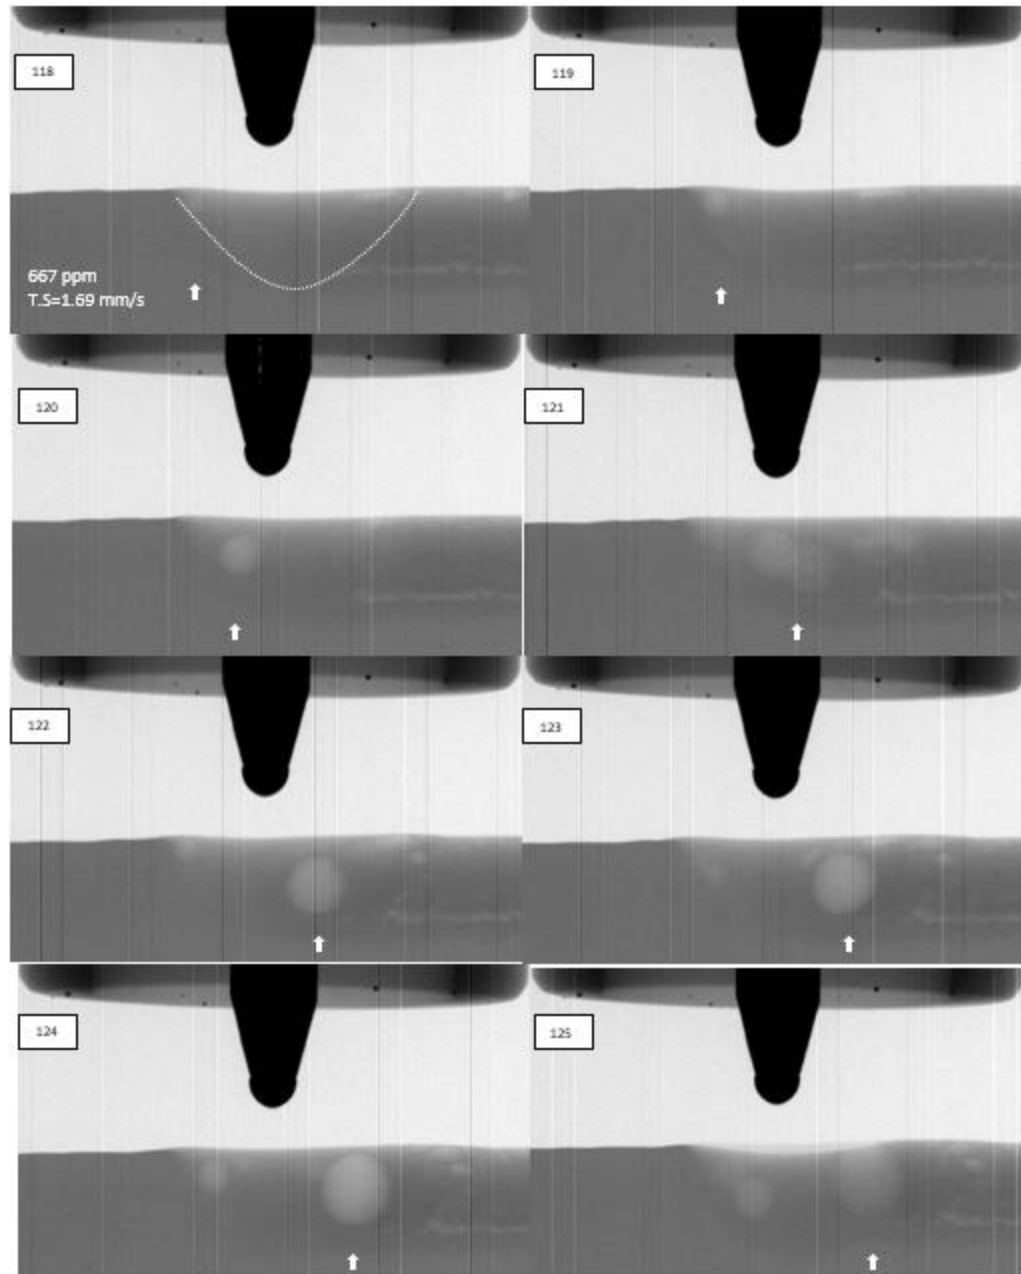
Alloy 6061 welded using 667 ppm of shielding gas hydrogen at 1.69 mm/s.
